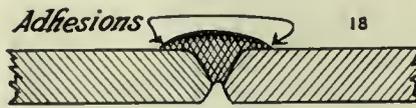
PREPARATION AND PROPER OUTLINE OF FLANGE WELD. FIG. 18—FLANGE WELD AS COMMONLY EXECUTED.
